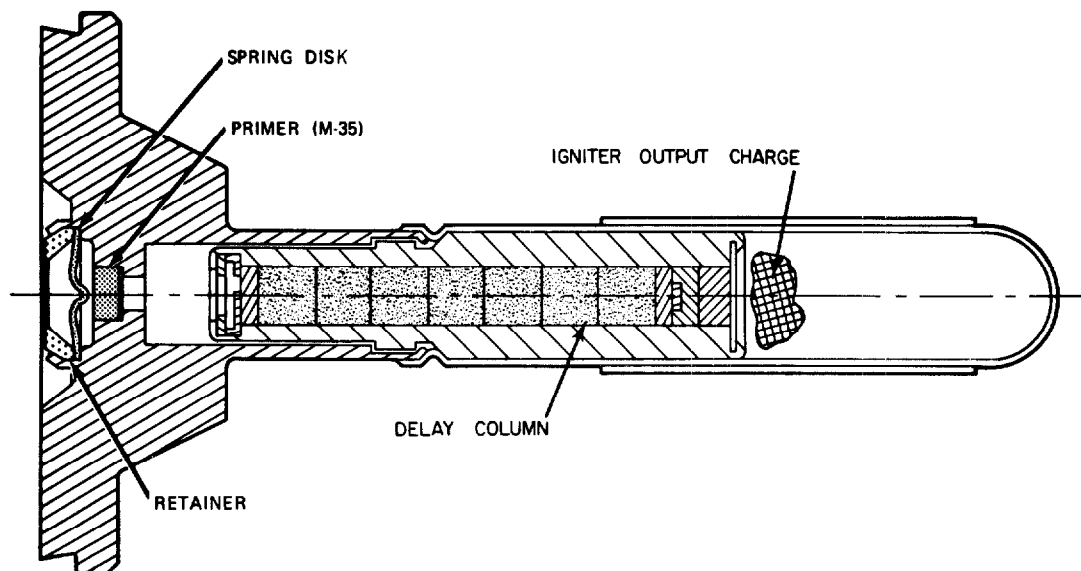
Igniter Mk 279 Mod 1, Cutaway View
